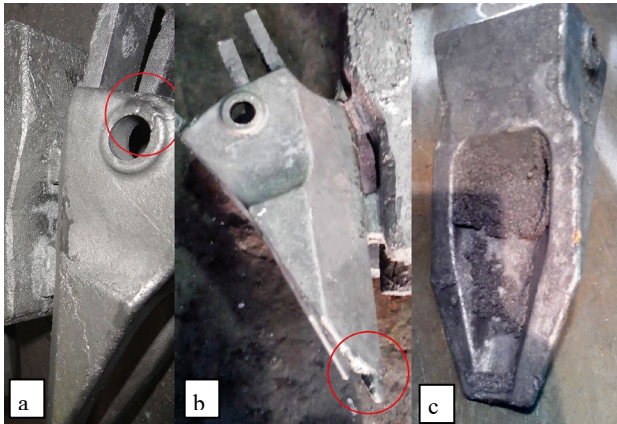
Casting defects in tooth castings: cold-shut (a), misrun (c), burn-on (c)
